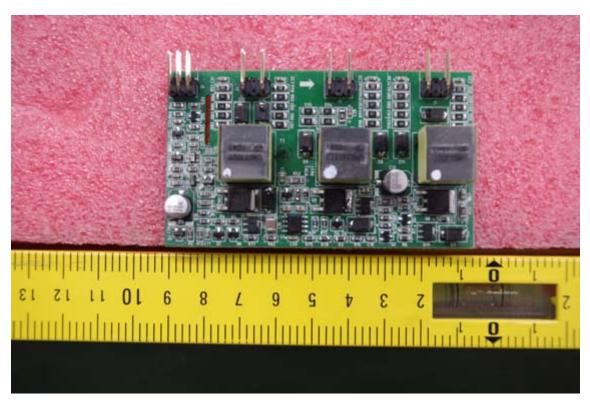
Board SNT_PCB_3320_FQ, components side view
